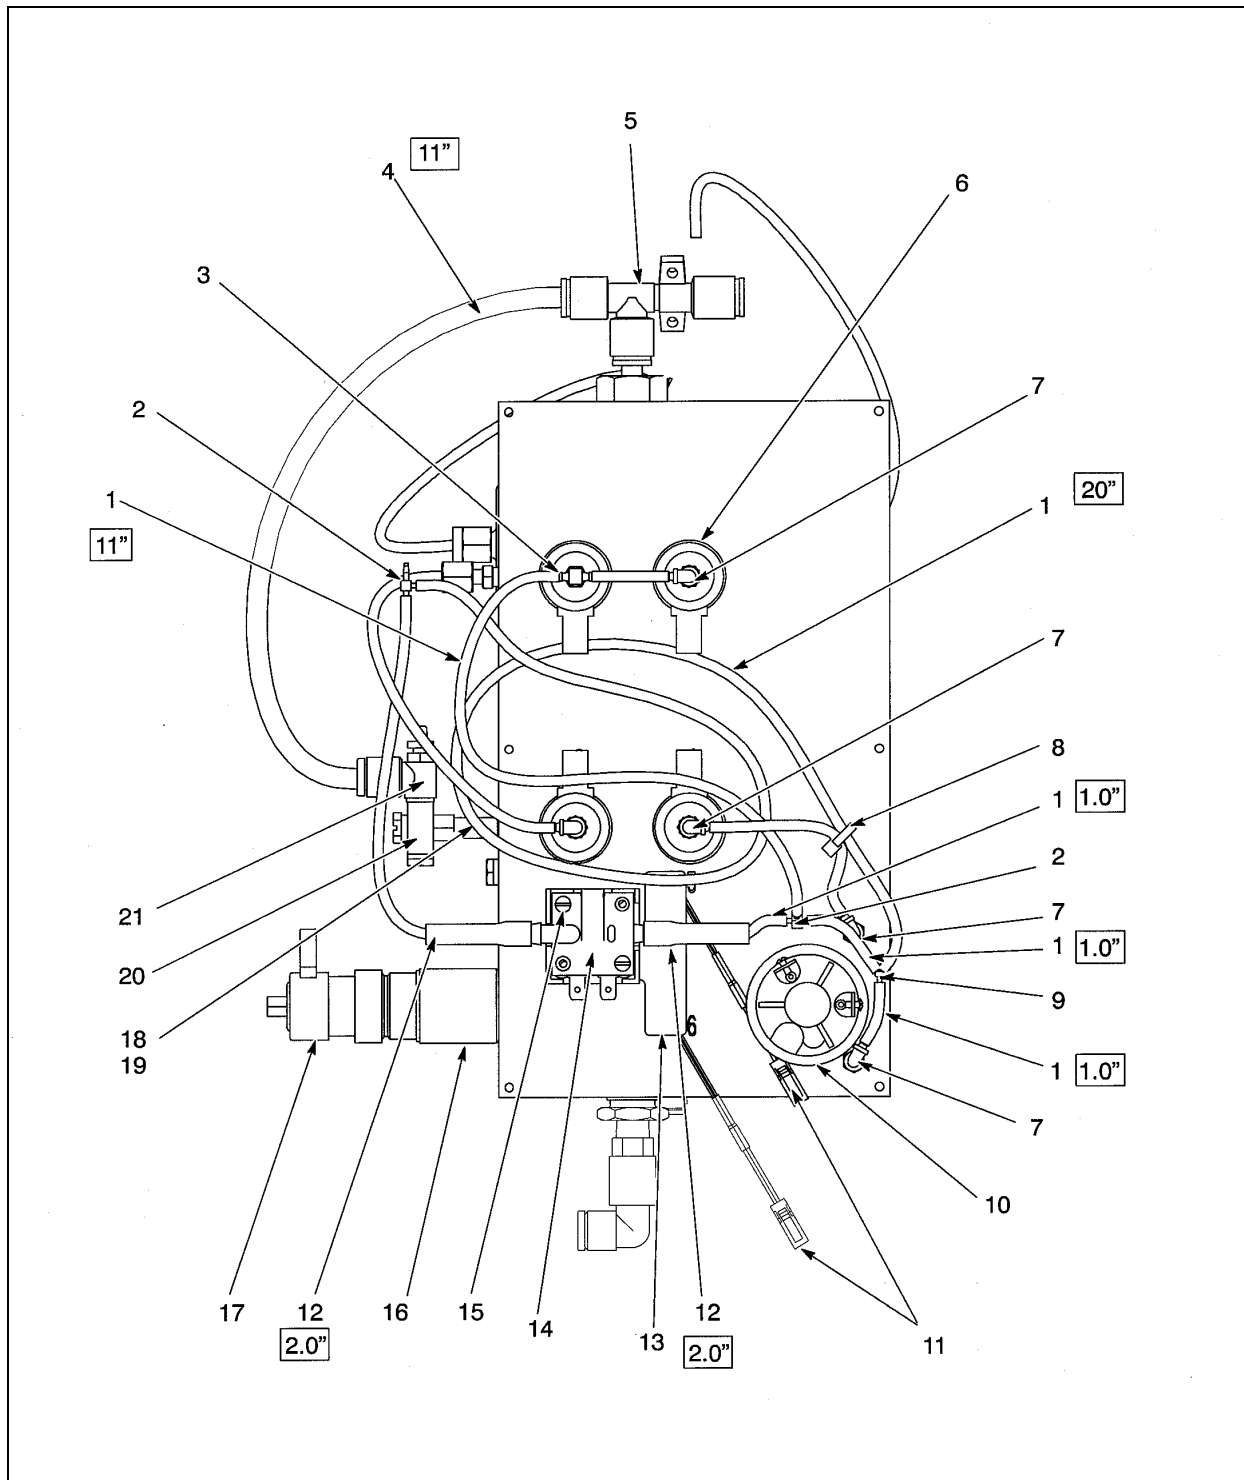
Ink Module Components (Older Triumph and T120 Printers Only)
